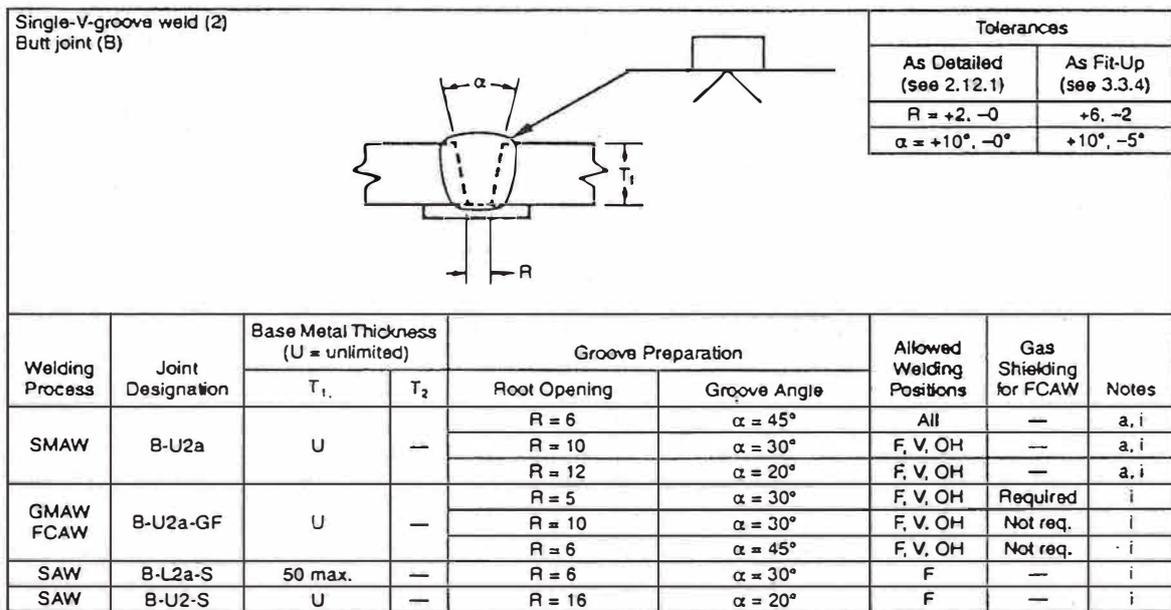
(Continued)—Details of Welded Joints for CJP Groove Welds (see 2.12.1) (Dimensions in Millimeters)
